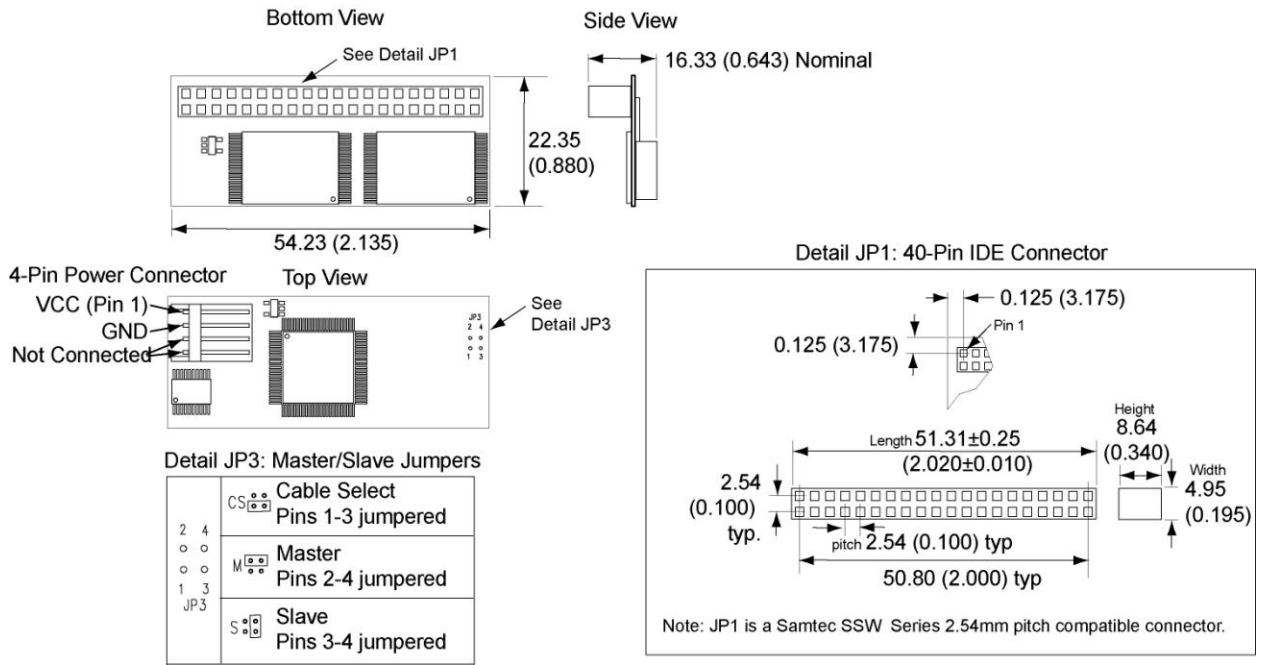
Mechanical dimensions 40-pin horizontal plug-in module
